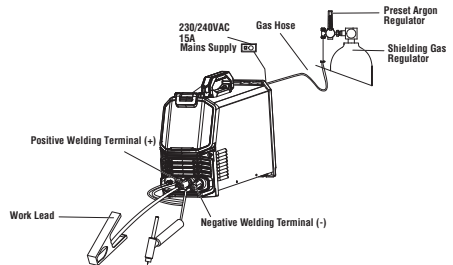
Setup For TIG (GTAW) Welding
